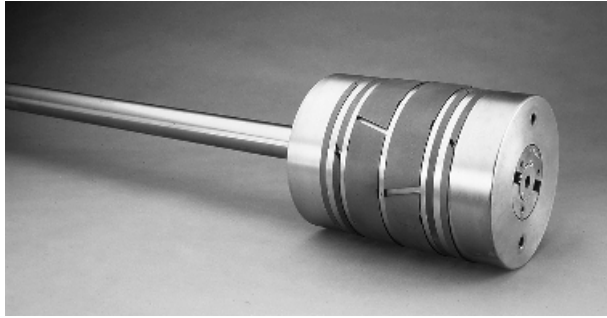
PTFE rider bands used to support pistons of contact-type nonlubricated compressors. (*Dresser-Rand Company, Painted Post, N.Y.*)
